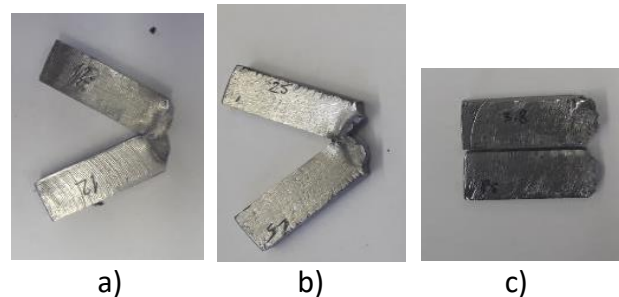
Representative impact testing specimens: a) Specimen 1; b) Specimen 2; c) Specimen 3
